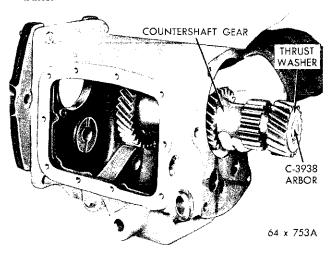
Removing or Installing Countershaft Gear and Arbor
